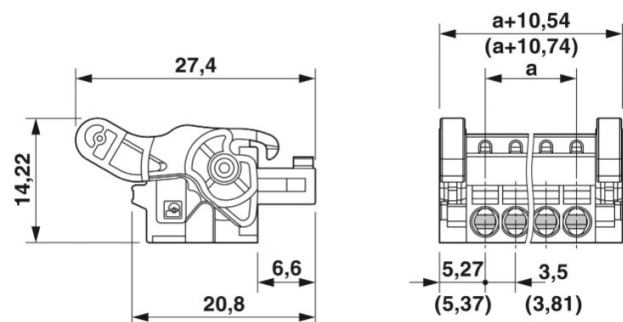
Dimension drawing TC.ACS X609 Adapter X631 plug
